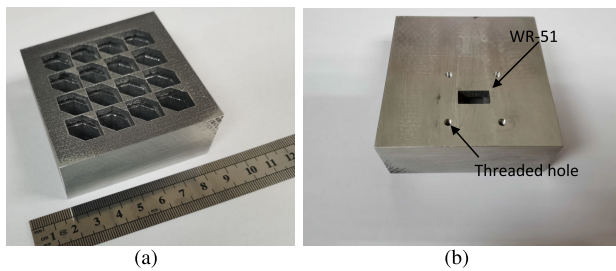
(a) Top view and (b) bottom view photographs of the fabricated 3-D printed antenna array.
